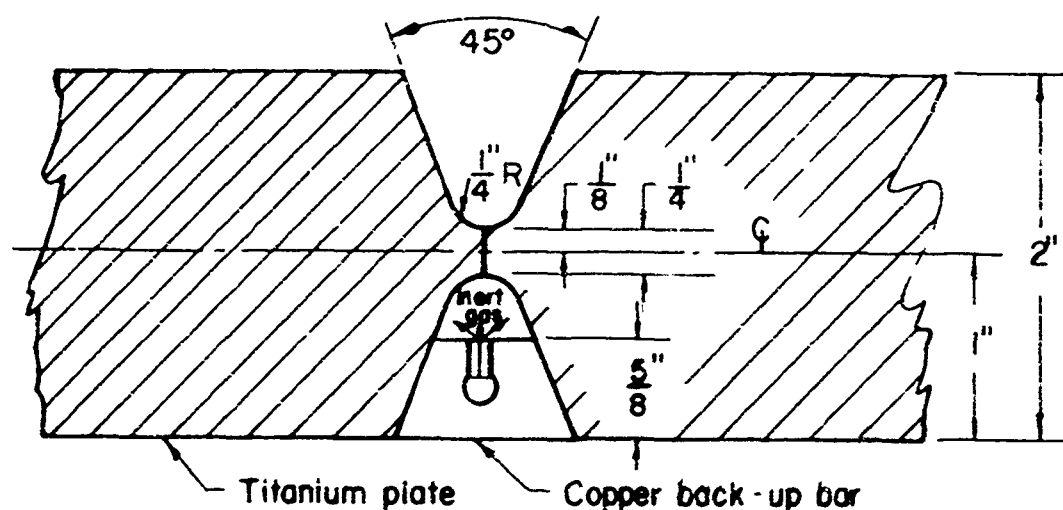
TYPICAL JOINT DIMENSIONS FOR WELDS IN 2-INCH-THICK Ti-13V-11Cr-3Al TITANIUM ALLOY PLATE (REF. 20)
